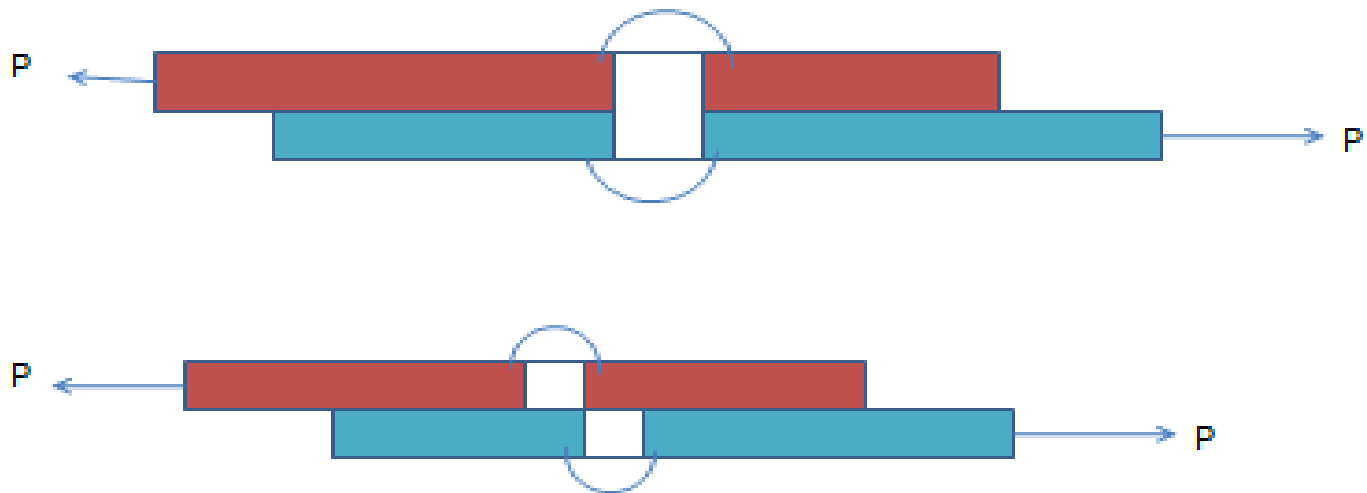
FIGURE SHOWS HOW SHEARING OCCURS IN A RIVETTED JOINT
